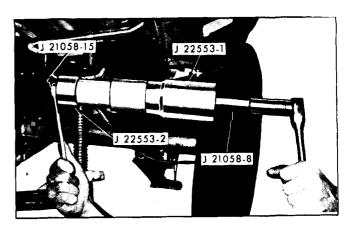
Installing Leaf Spring Front Bushing (F Series Shown)
